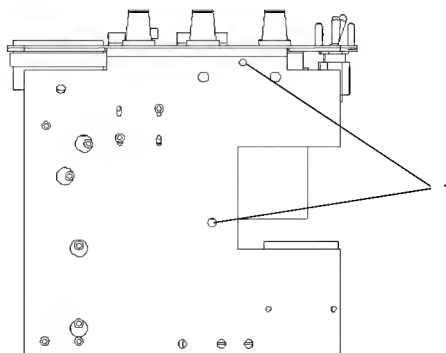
Bottom view of the drawer unit of the Oxylog 1000, removing the screws
